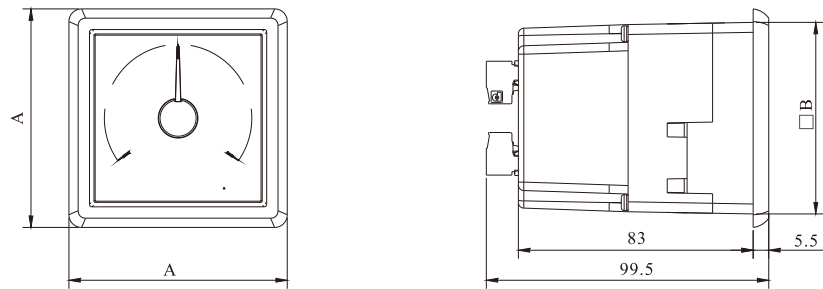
Dimension(Panel Mount) 图1 面板内嵌式尺寸
